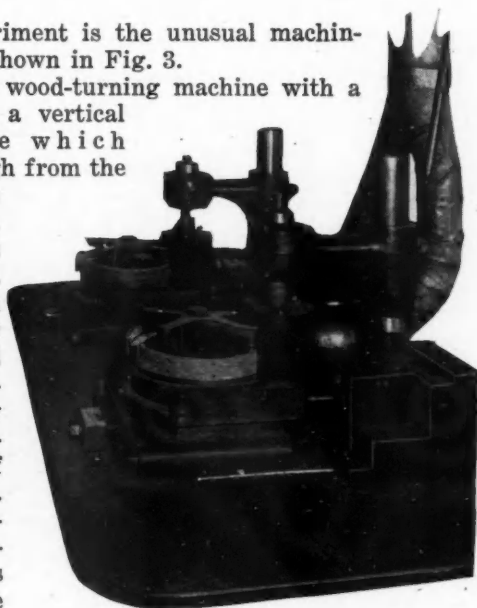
Converted wood-turning tool for automatic machining of brake lining
